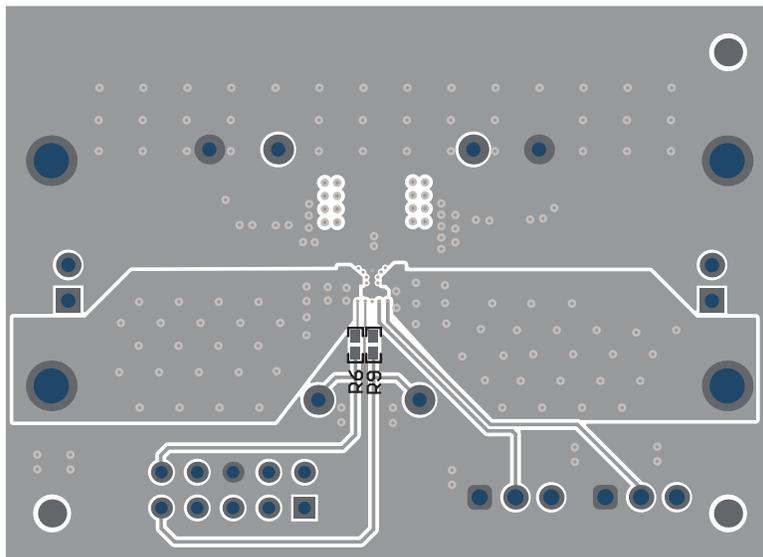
TPS63820EVM PCB - Bottom Layer
